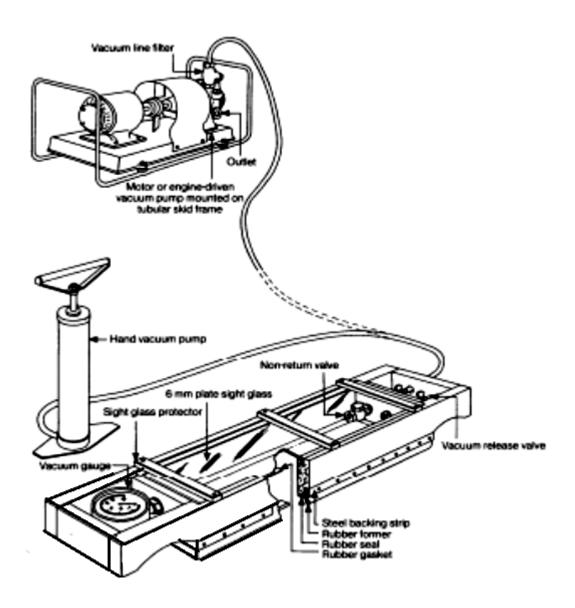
Typical motor driven Vacuum Test Equipment.
